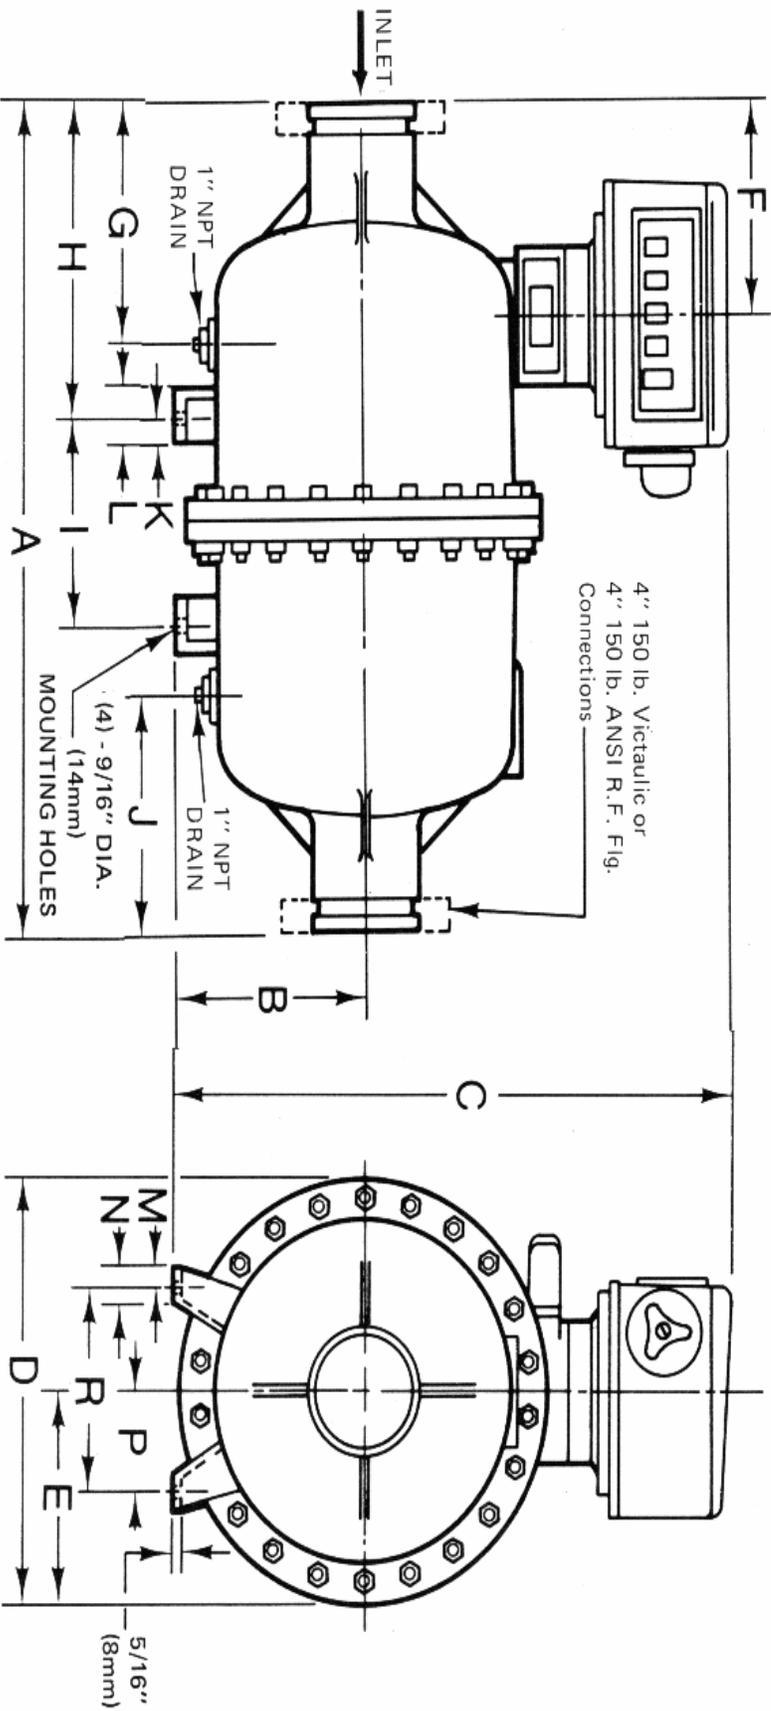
DIMENSIONS—Shown with Accuracy Adjustor and Large Dial Register
